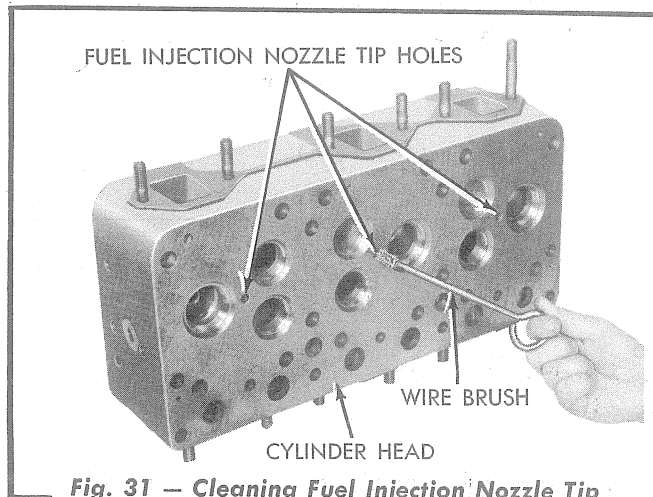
Cleaning Fuel Injection Nozzle Tip Hole in Cylinder Head (Tractors Serial (No. 4001 and Above)
